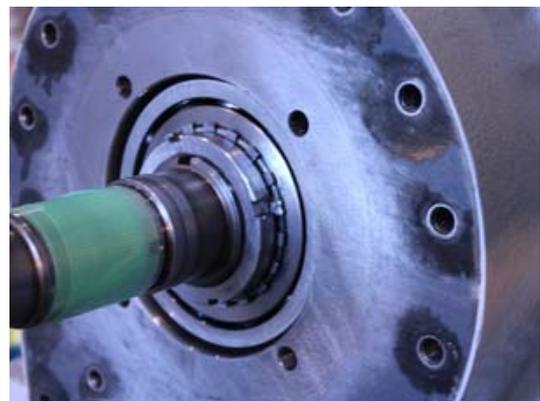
Speed Increaser Drive Gear and gear spindle
